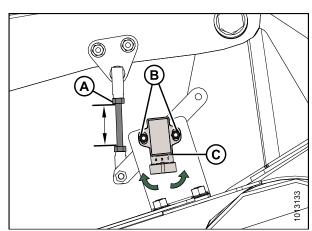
Reel Height Sensor – Right-Hand Reel Arm
